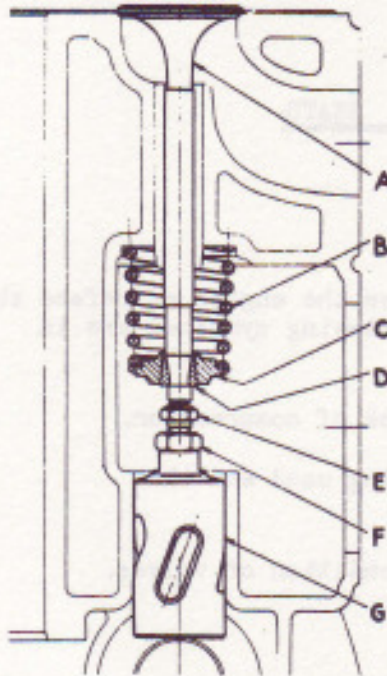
ARRANGEMENT OF EXHAUST VALVE WITH CAST IRON GUIDE.
